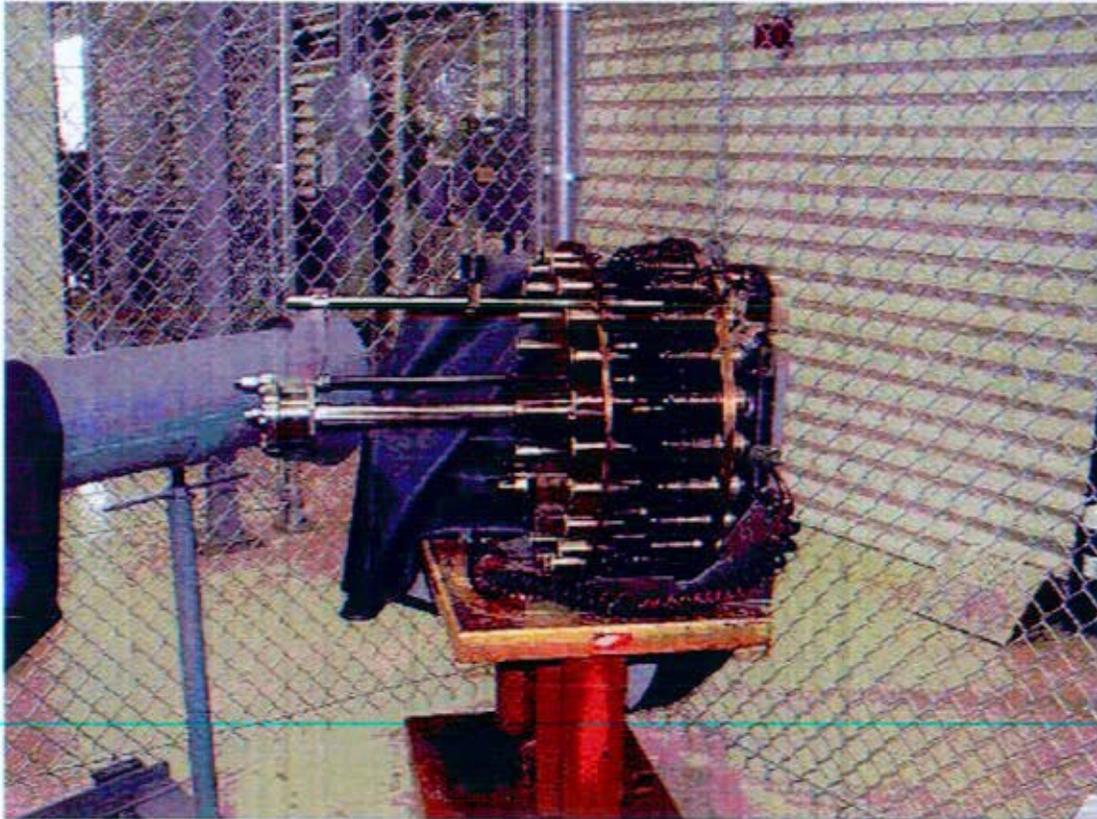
Twenty-four specimen, rotating EB welding fixture
